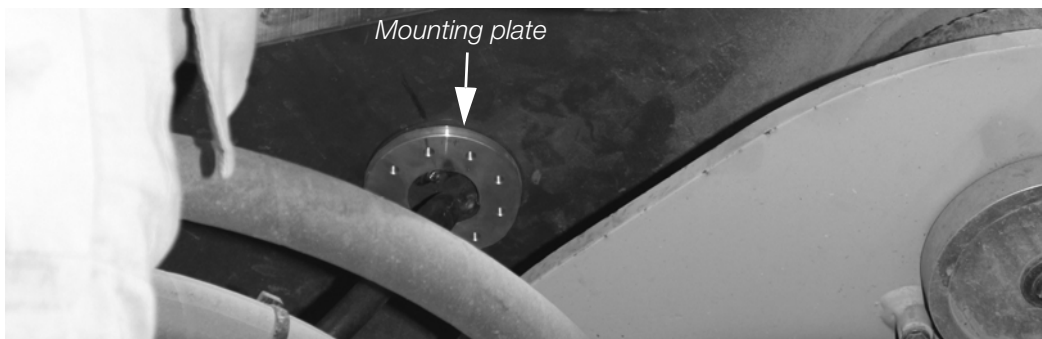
Weld The Angle Sensor Mounting Plate Onto The Support Arm
